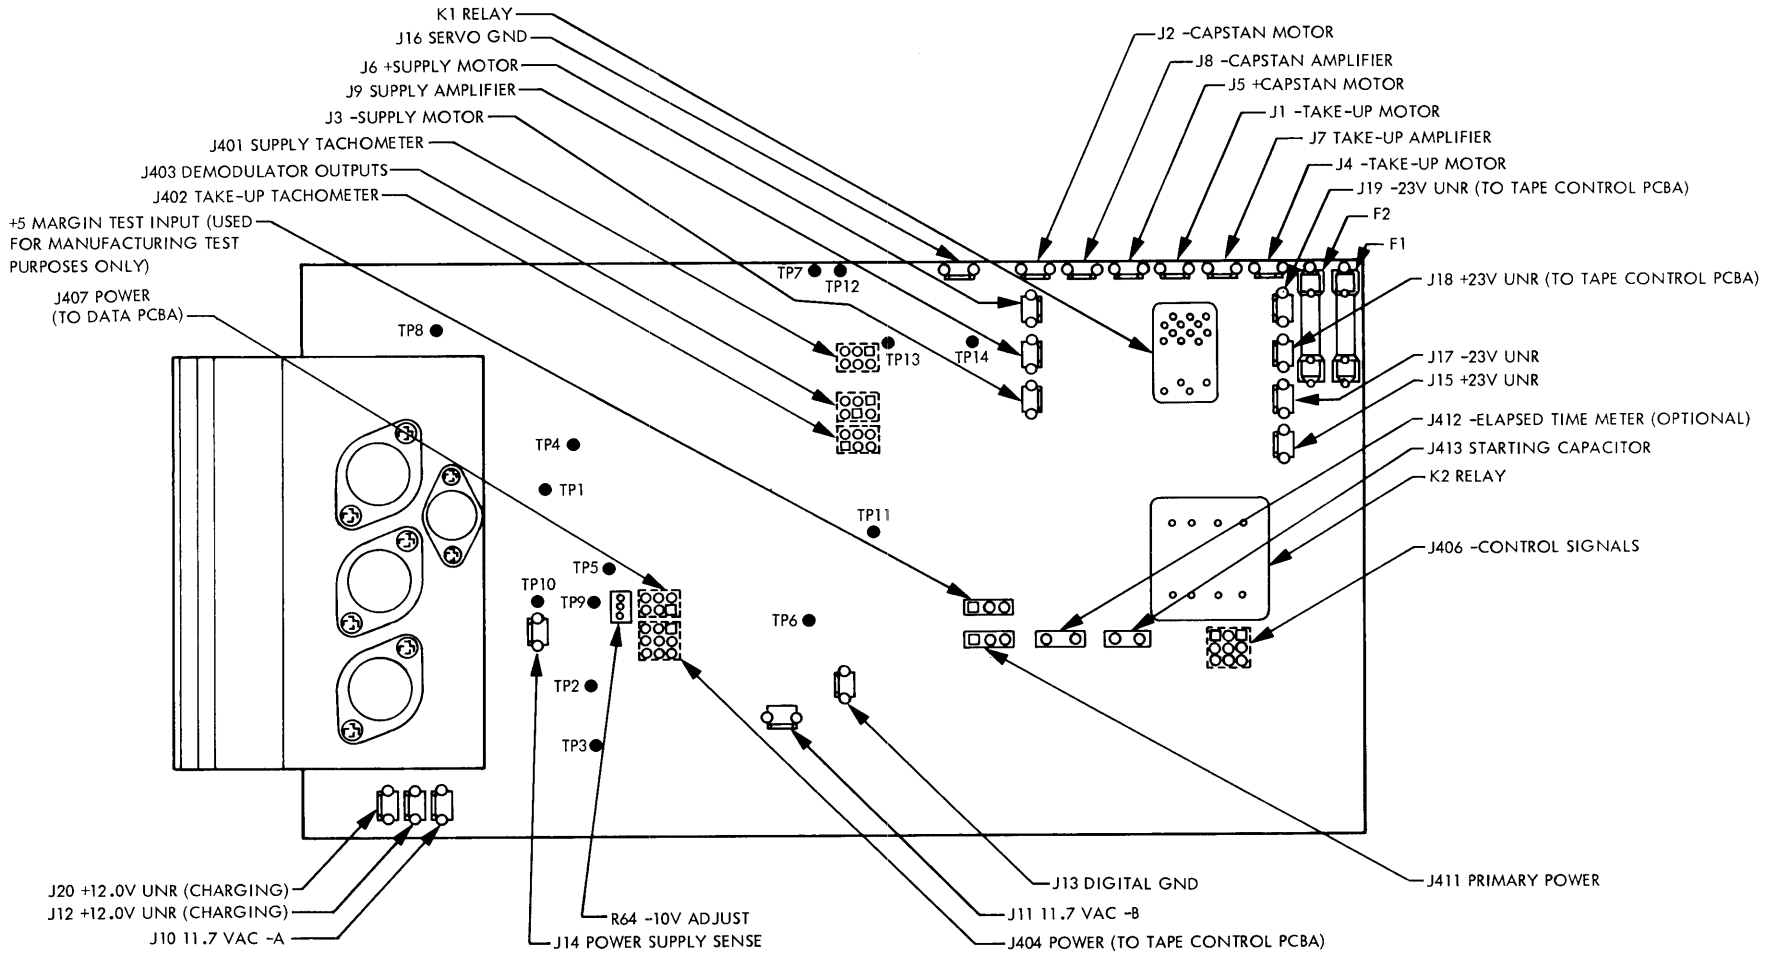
Power Supply G1 PCBA, Test Point and Connector Placement
